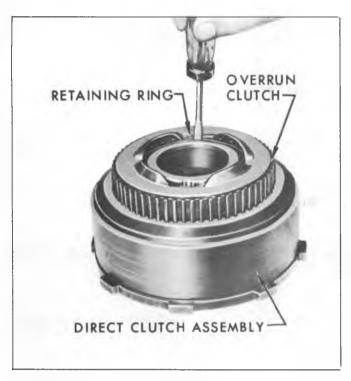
M--Removing Overrun Clutch Retaining Ring and Retainer
